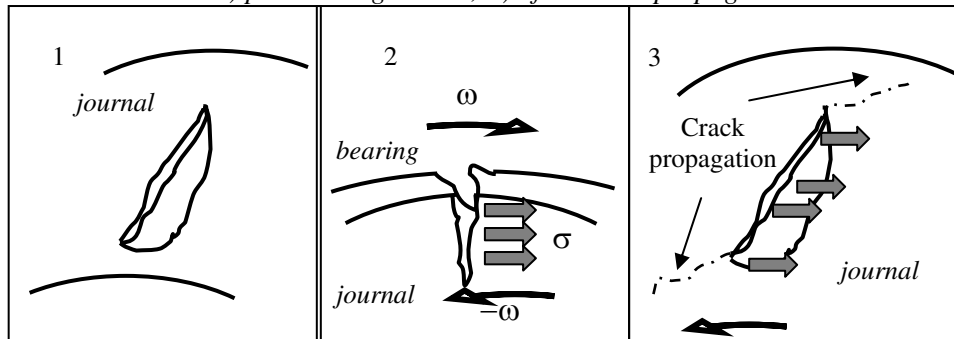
Schematic damage mechanism under wear fatigue after a pre-existing crack.
